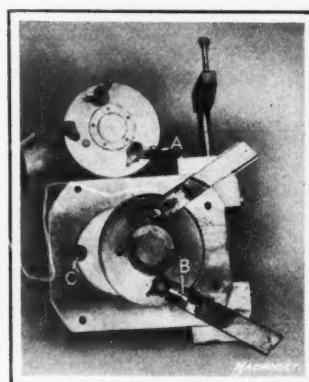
Lower Member of Die for Casting B, Fig. 1
